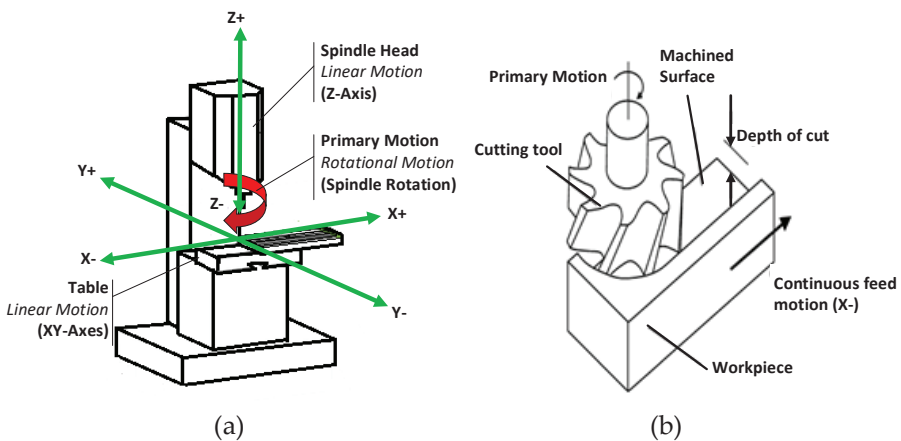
(a) Vertical milling machine architecture and (b) motion types milling [1]
